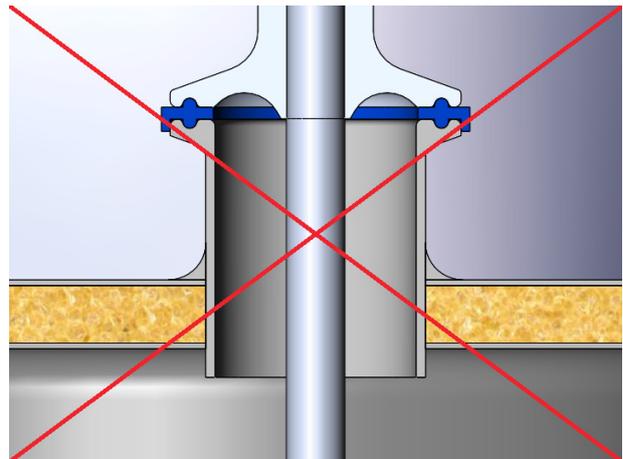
Welded non-flush on the inside and polished
